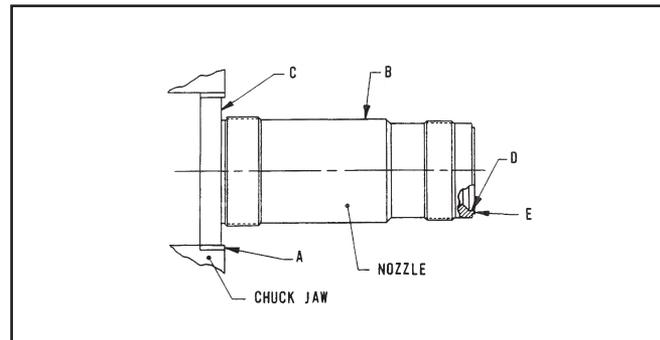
Lathe Set-Up for Machining Nozzle Seat
